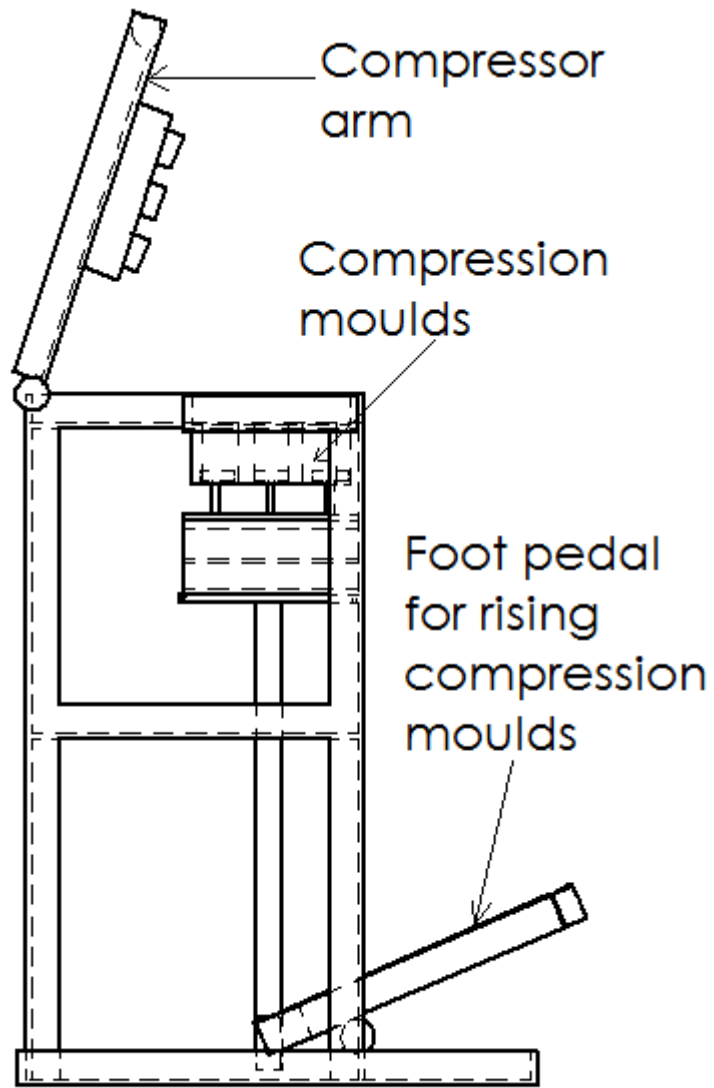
Longitudinal cross-sectional view of the low pressure briquetting machine
